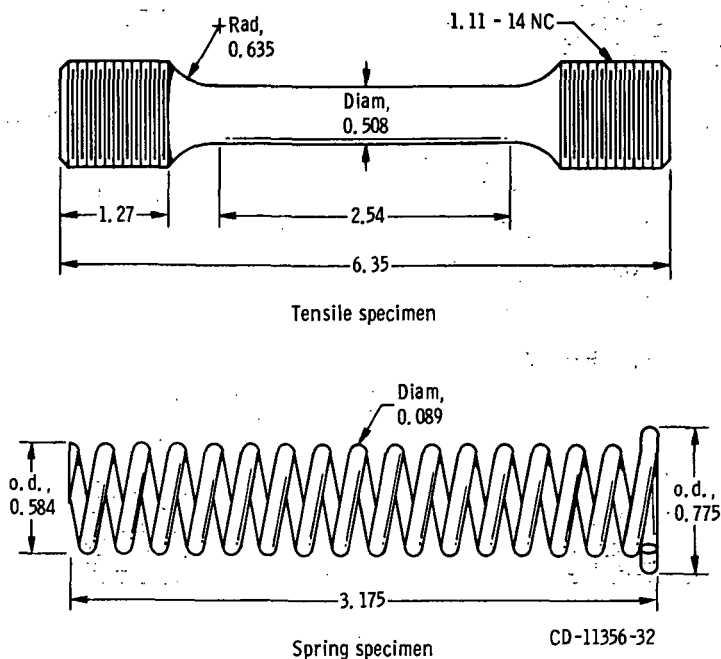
17-7 PH stainless steel test specimens. (Dimensions in centimeters.)
